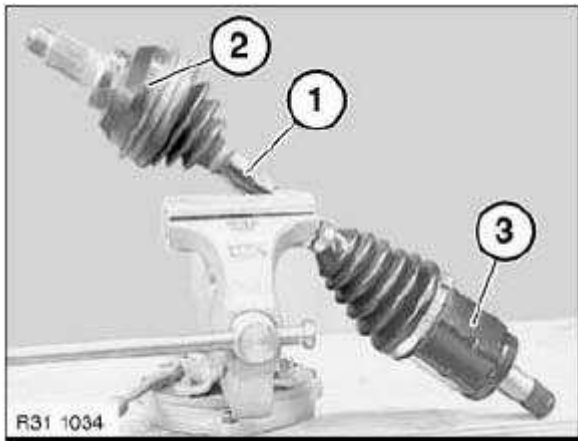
Output Shaft, Wheel And Transmission Side Joint
